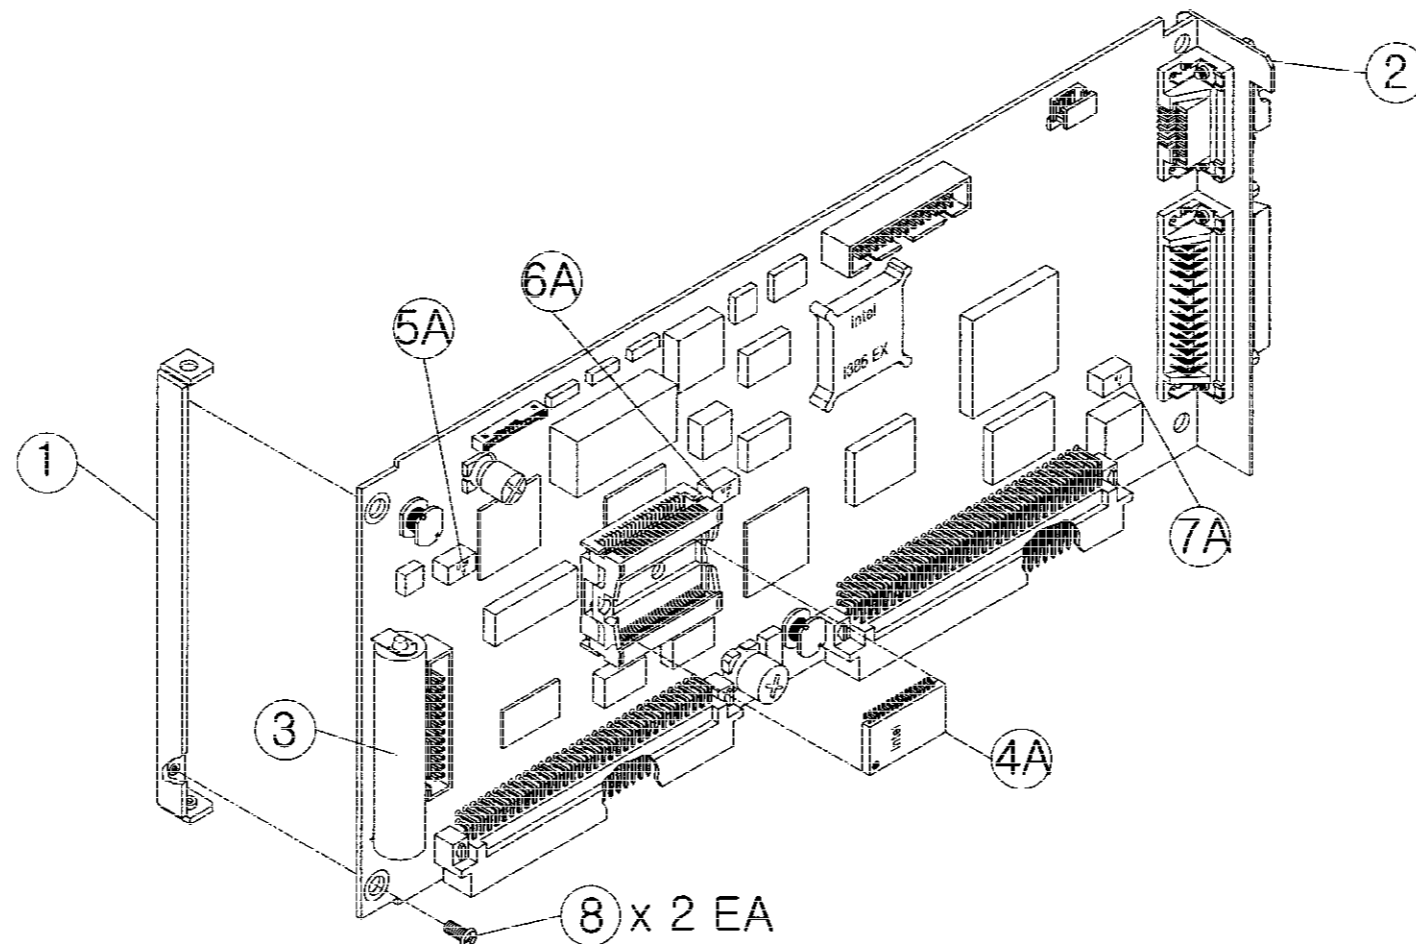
MAIN BODY ASSEMBLY 7-13
